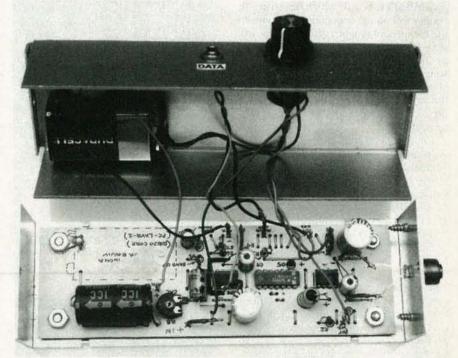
A COMPONENT-POSITION TEMPLATE cemented to the pre-drilled PC board will simplify assembly.
